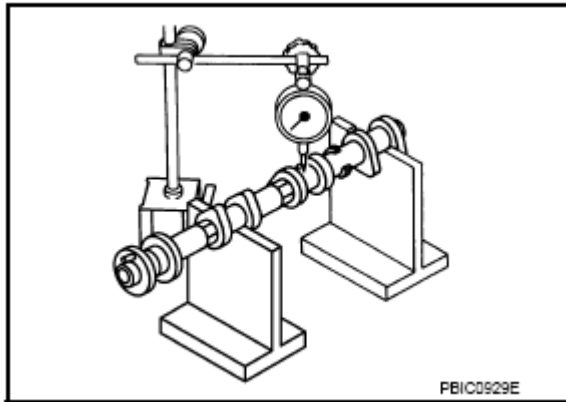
Measuring Camshaft Runout Using Dial Indicator
